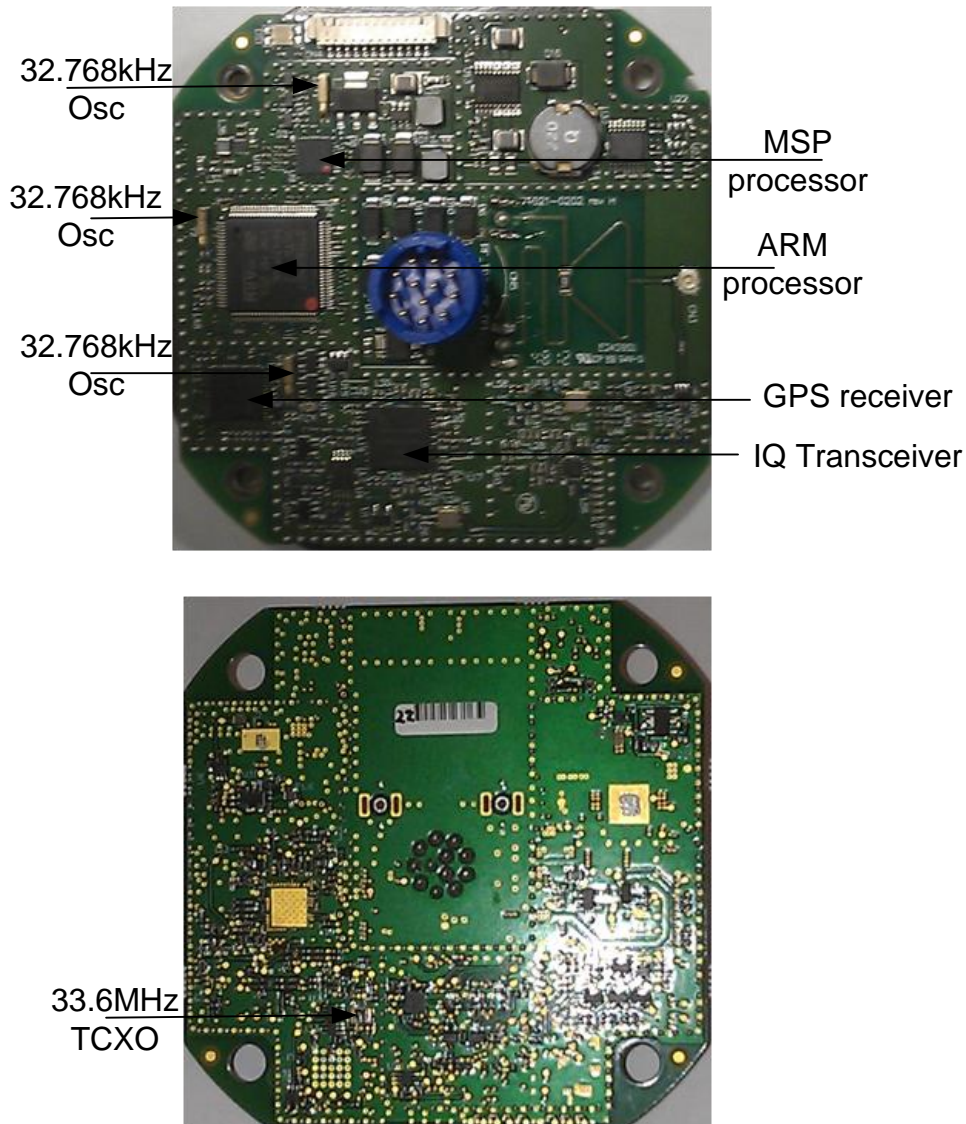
Location of Key Parts on Bottom Side of Modem Board
